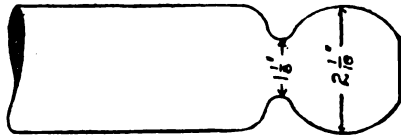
FIRST OPERATION IN FORMING TOOL TO MAKE WRENCHES.
